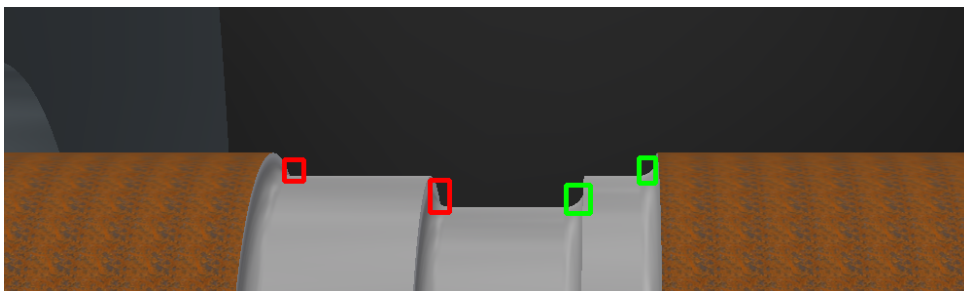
Drill-pipe 4. Detected weld start and stops for multiple grooves
